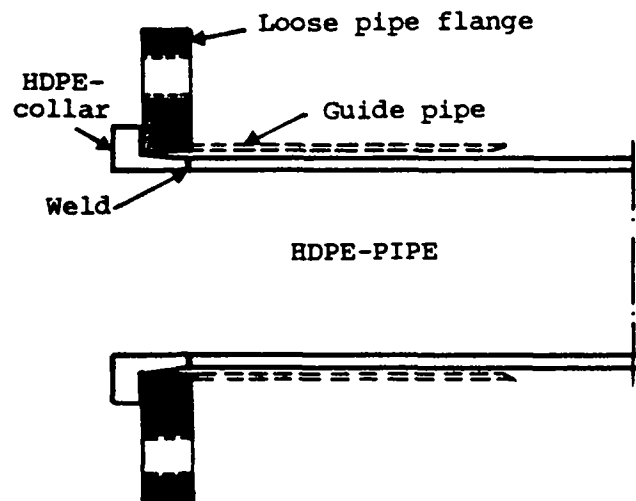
Flanged joint for a HDPE pipe. Guide pipe shown dotted.
